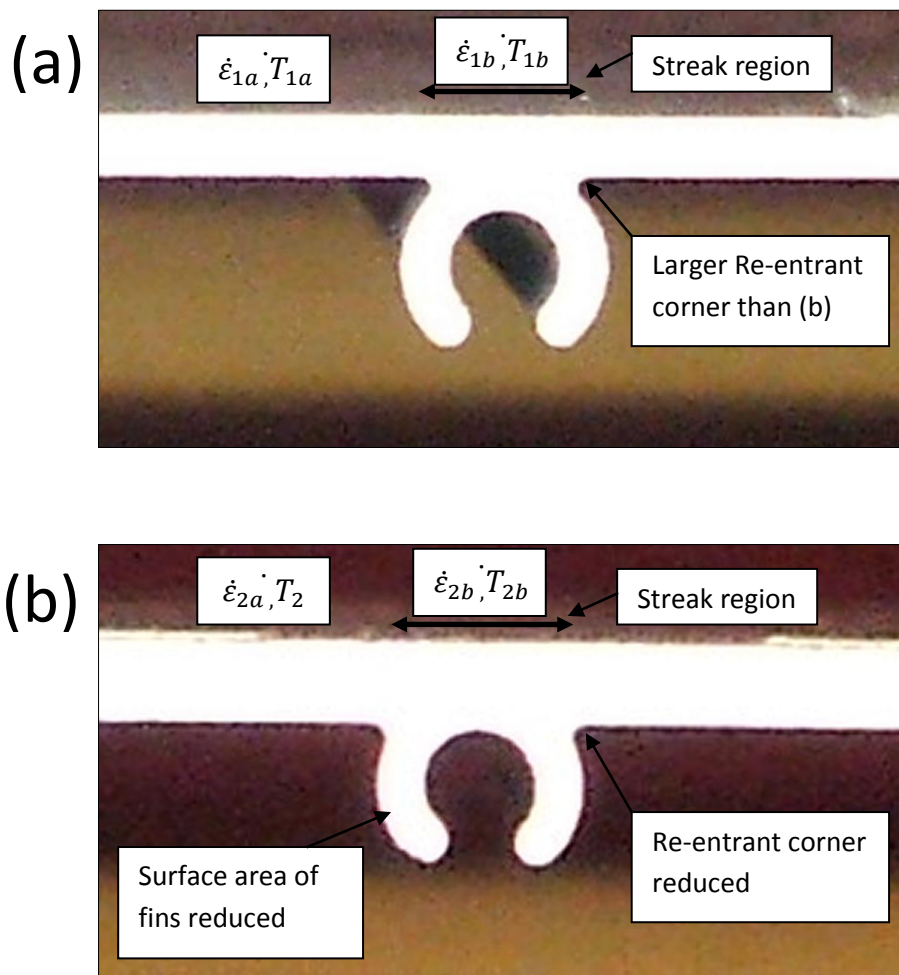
Diagram outlining thermo-mechanical extrusion parameters (a) Extrusion version 1 –old design (b) Extrusion version 2 – modified design
